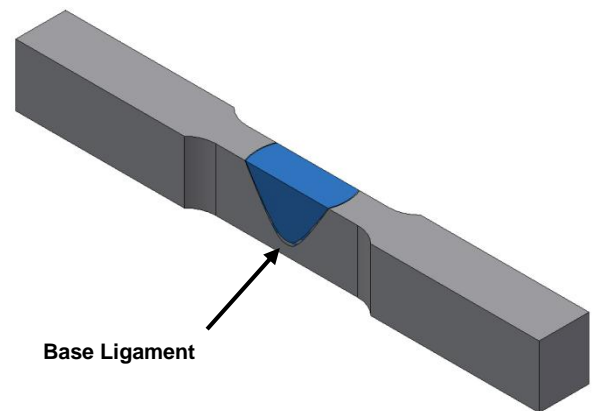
Tensile Sample showing Weld Nugget
